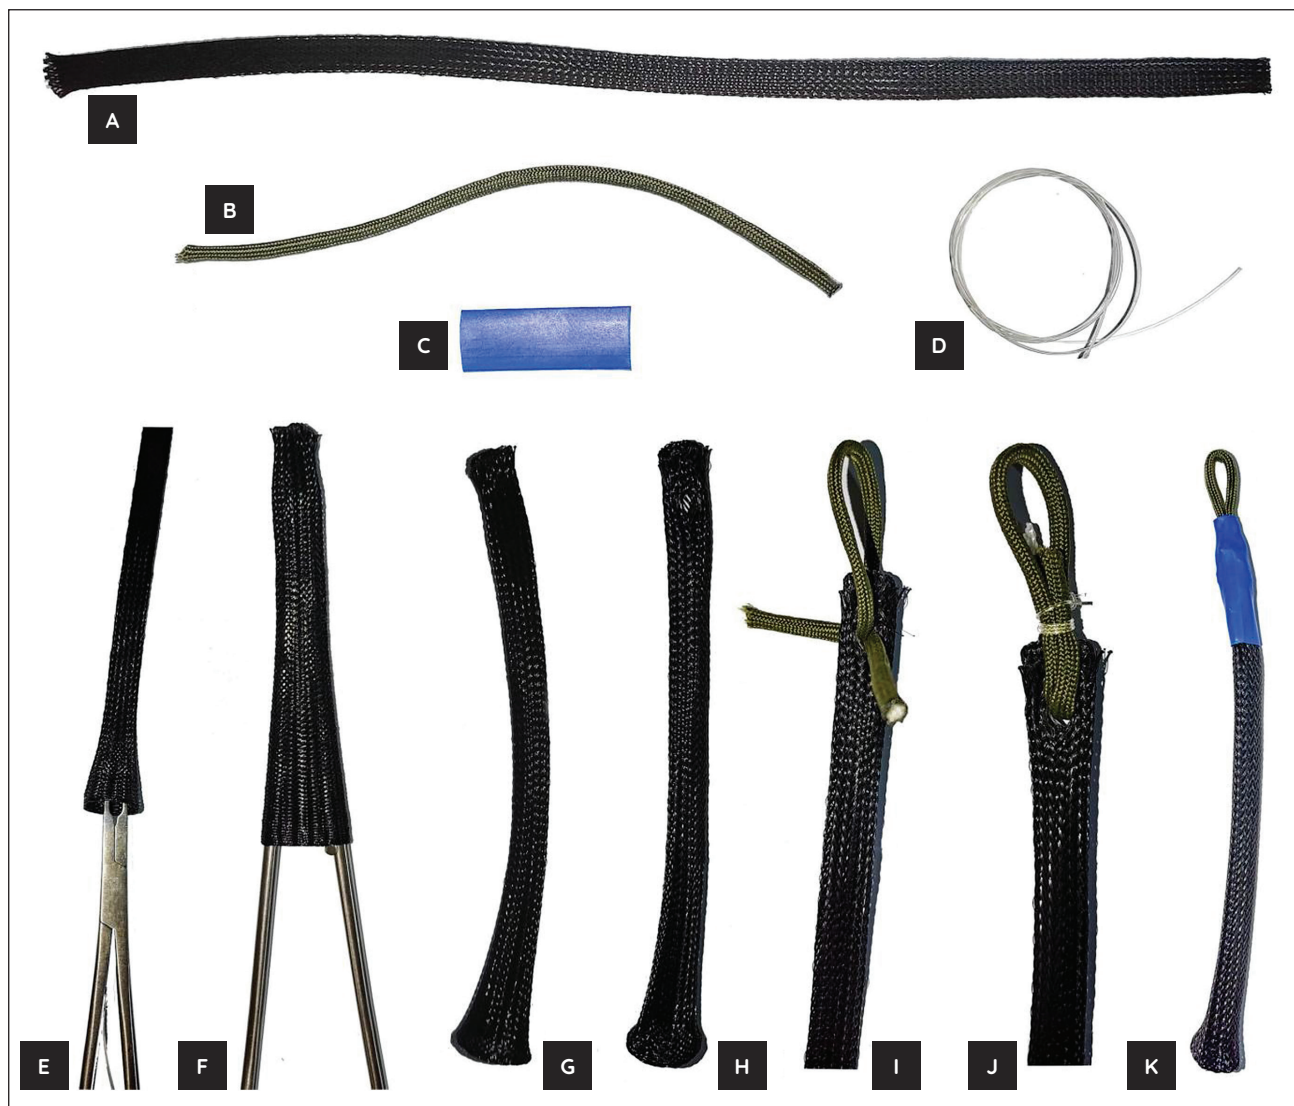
Materials. Nylon braid tubular sleeve (A); 5 mm Nylon braid cable (B); Heat shrink tube (C); 1 mm nylon string (D). Fabrication. Clamp telescoping closed end into the rest of the tubular sleeve (E); closed end pushed up to the open end (F); while maintaining both closed and open end, the sleeve is uniformly stretched out (G); a hole is made through the sleeve (H); a 5 mm nylon braided cable is passed through the hole (I) and is secured by 1 mm nylon string and later epoxied (J) and; covered by a heat shrink tubing (K).
